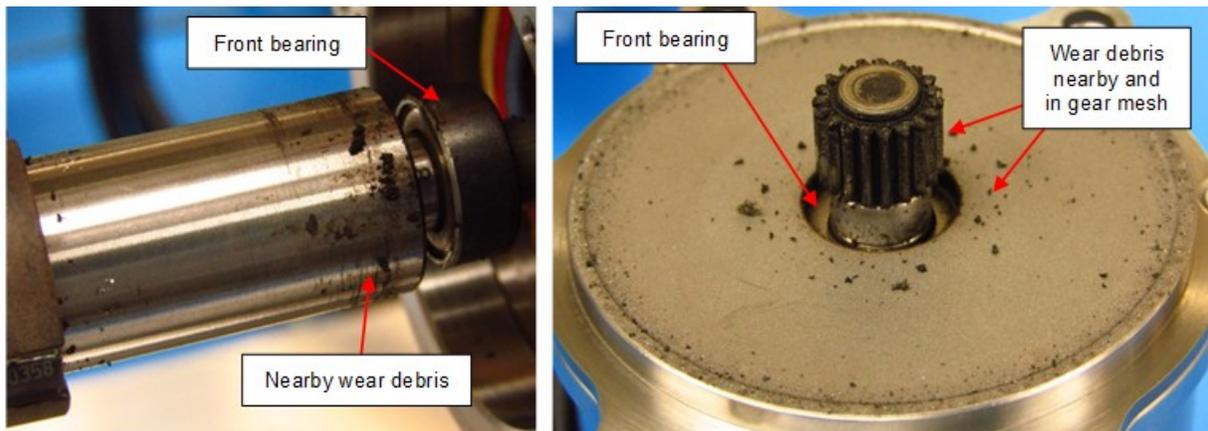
Wear Debris Surrounding the M45S Front Motor Bearing from ShEI DV Unit
